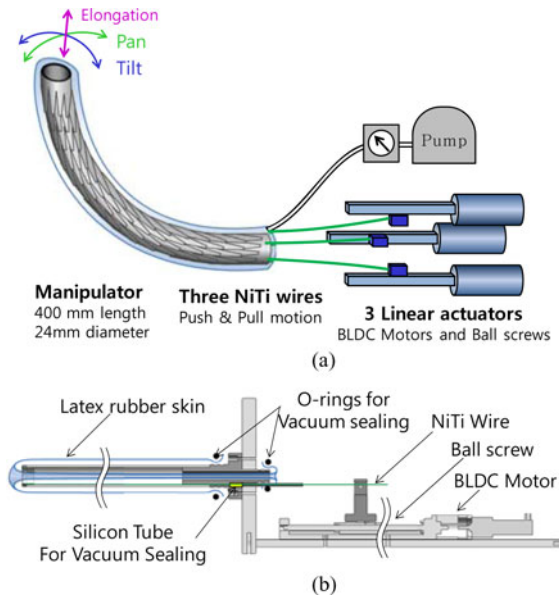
(a) Concept design of layer jamming manipulator. (b) Section view of manipulator and one actuator.
